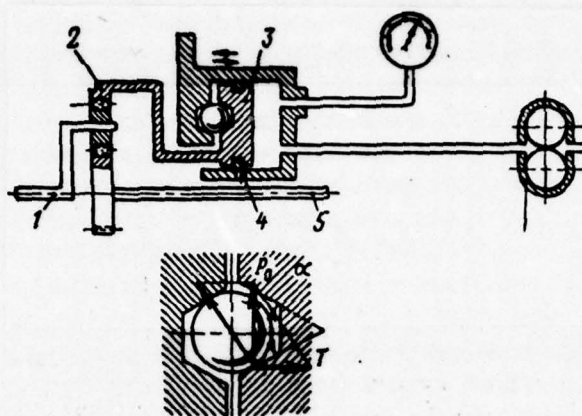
Schematic diagram of hydraulic IKM with ball/spheres. 1 - the shaft of engine, 2 - gear, 3 - piston, 4 - hole for oil drain, 5 - output shaft.
